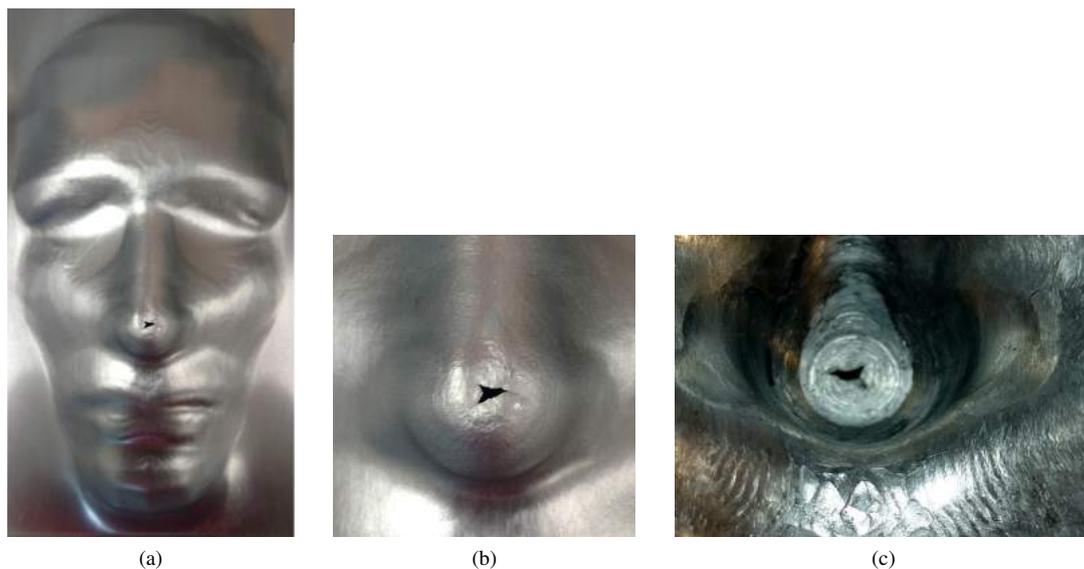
Test 03 (a) Final part (b) Detail of the external fracture (c) Internal detail of the fracture
